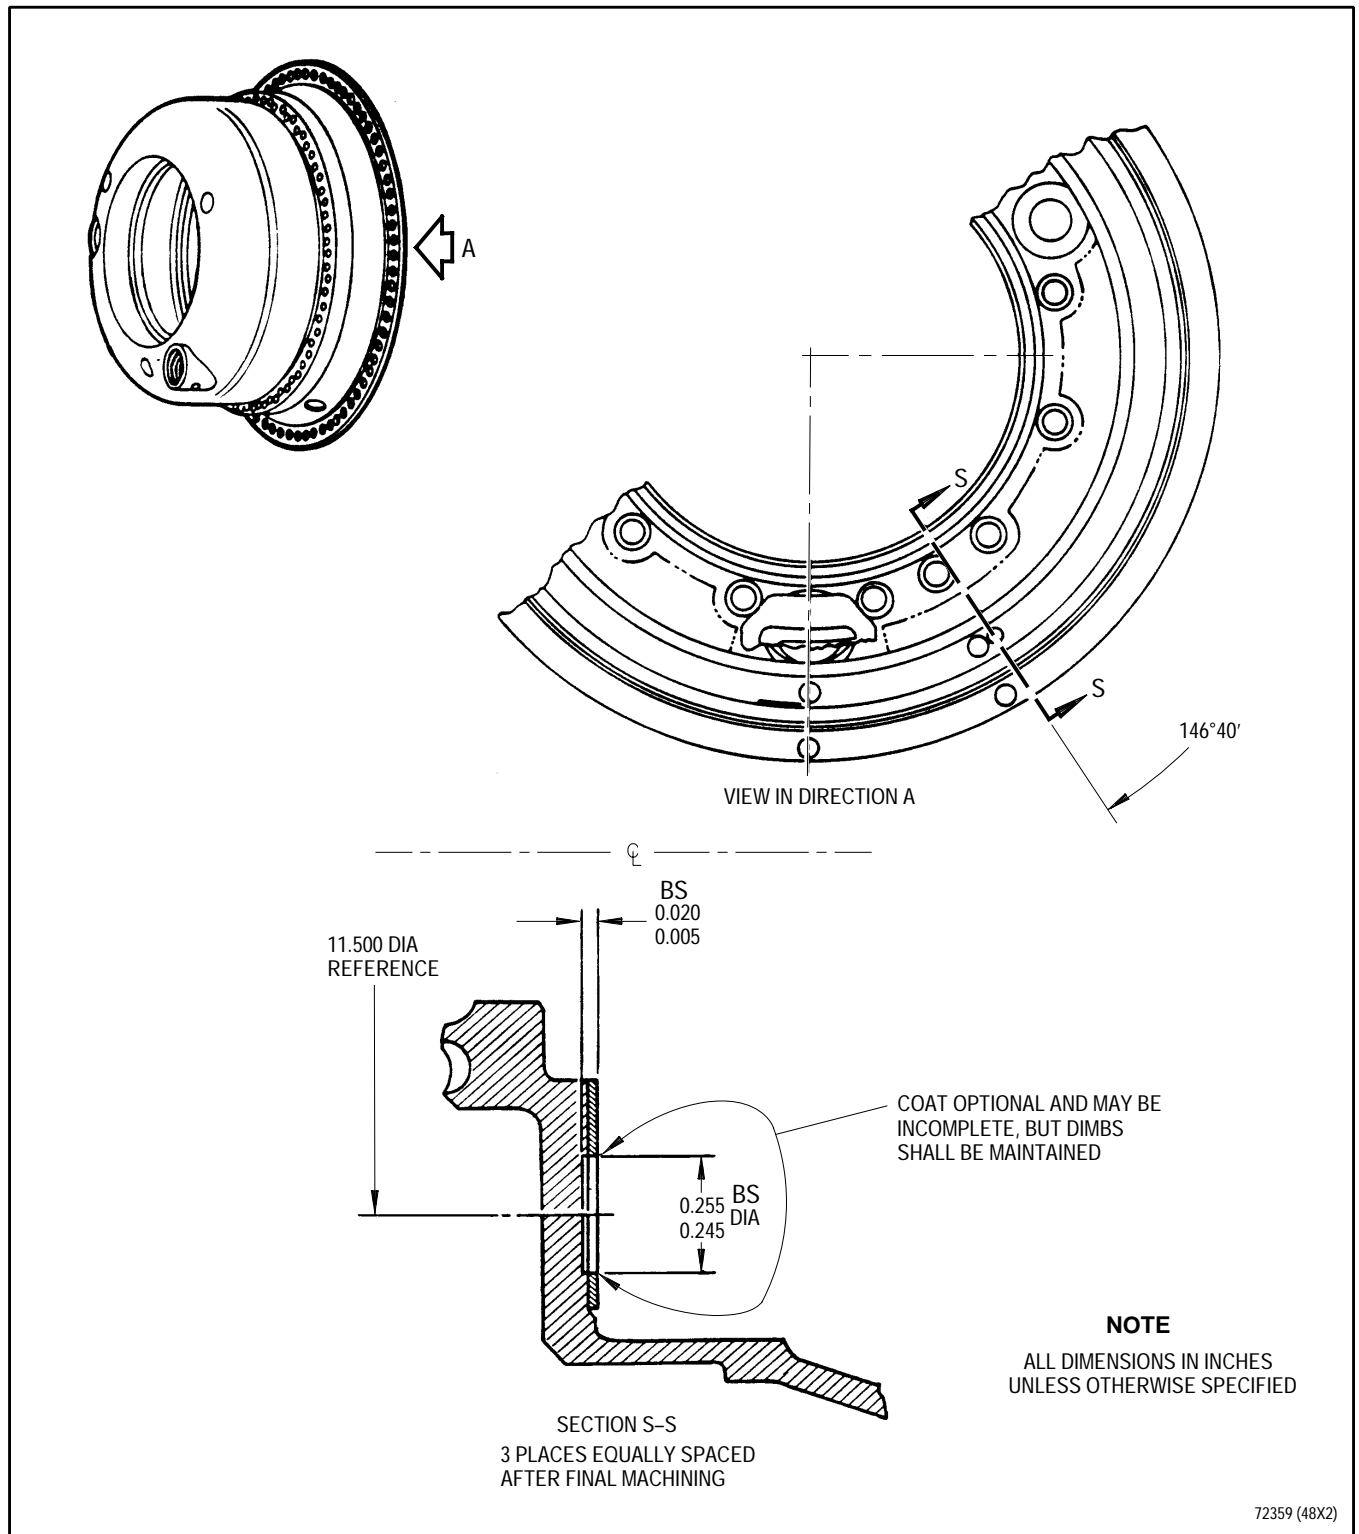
No. 4 Bearing Front Seal Support Assembly - Rear Mating Face Plasma Spray
